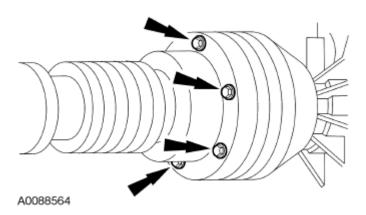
Locating Bolts Holding Driveshaft To PTU Courtesy of FORD MOTOR CO.
